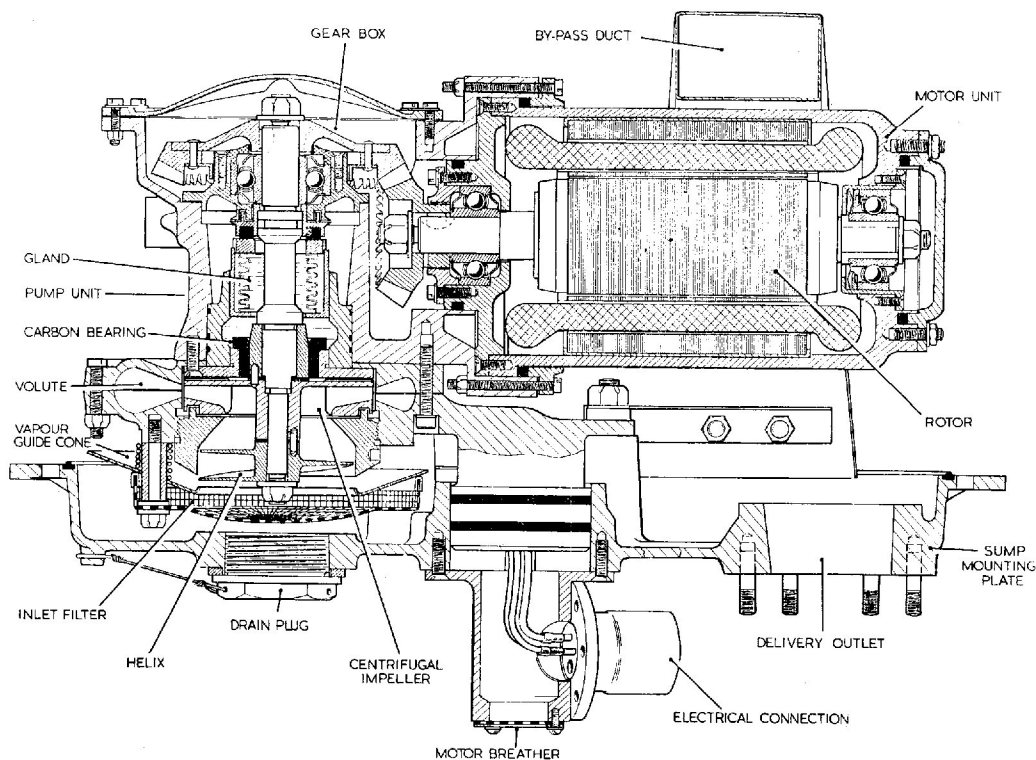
Sectional view of SPE. 1236 Mk. 2 fuel pump
